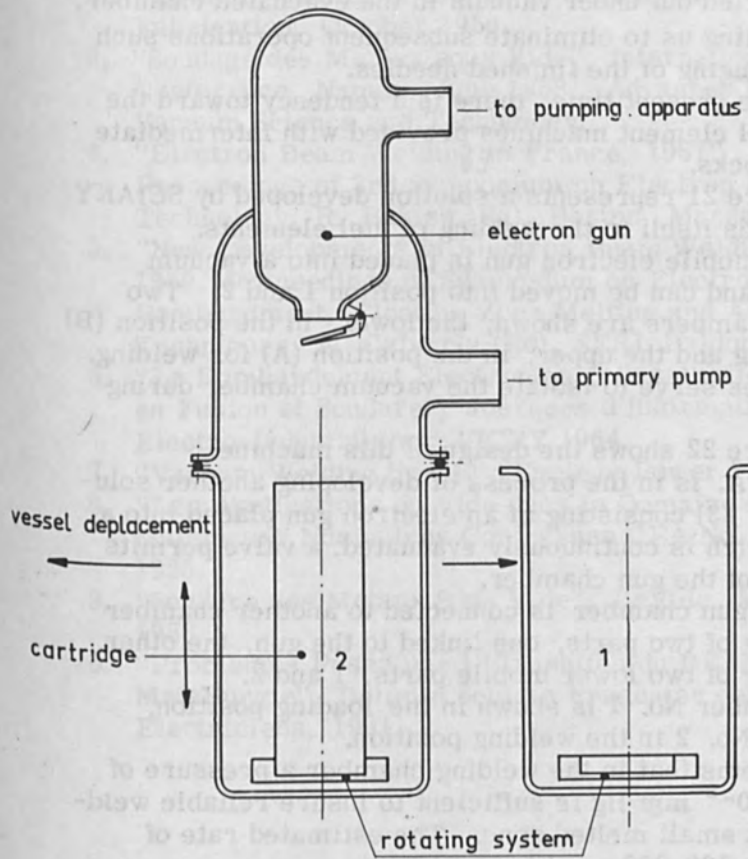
Schematic diagram of the new design for a welding machine (fuel elements welding)
